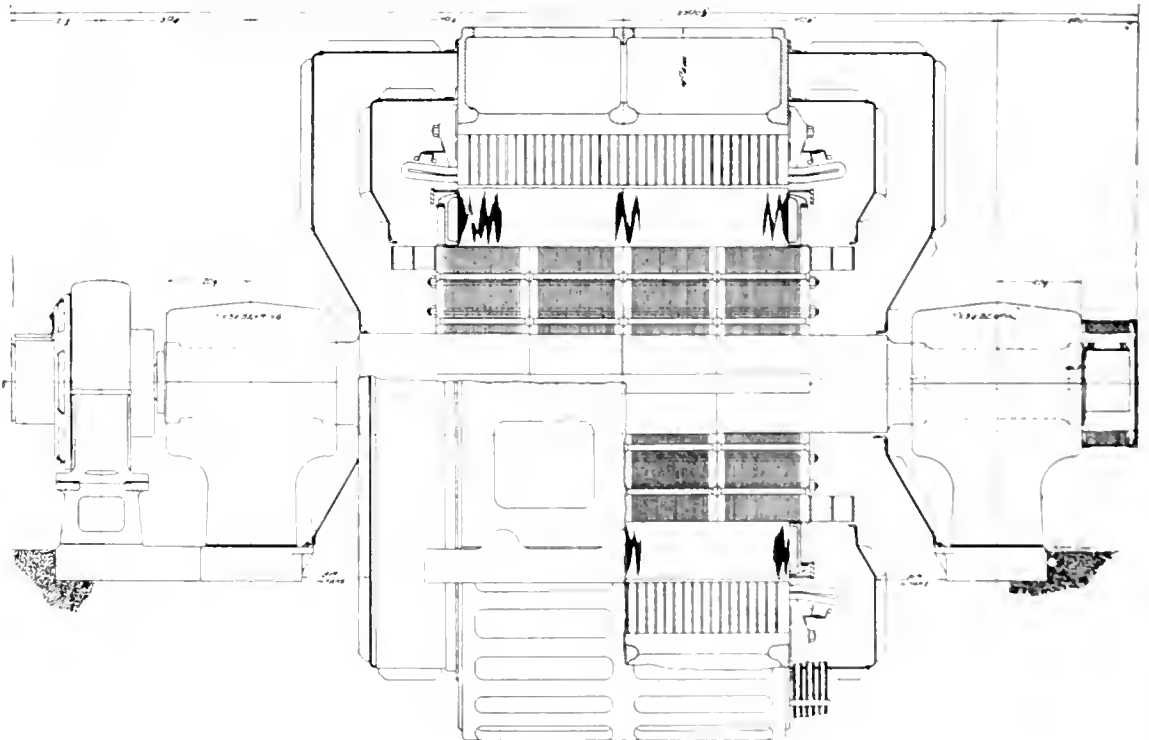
Sectional Drawing of a 30,000 kv-a., 6000-volt, 600-r.p.m. Totally-enclosed Synchronous Condenser
